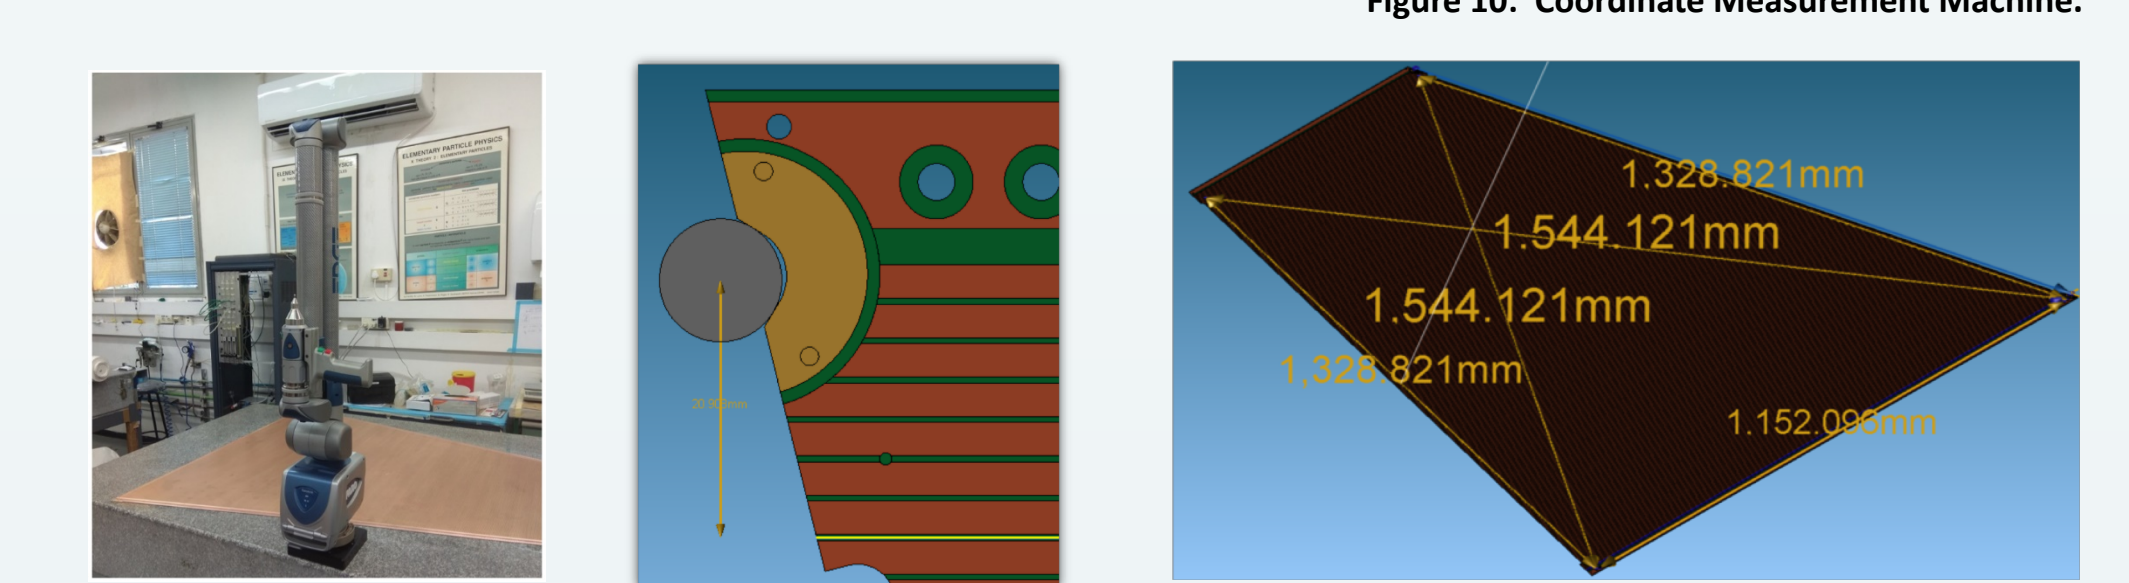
Dimension measurements. Left: the FaroArm 3D measurement instrument. Middle: measurement of the scale parametric. Right: measurement of the boards dimensions.
